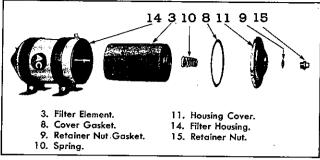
Details of Replaceable Type Lubricating Oil Filter Assembly.
